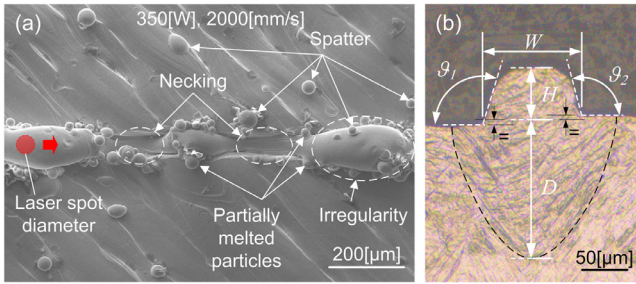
Single track morphology. Top view with typical defects (a) and cross section measurements (b), where the Heat Affected Zone is also visible.
